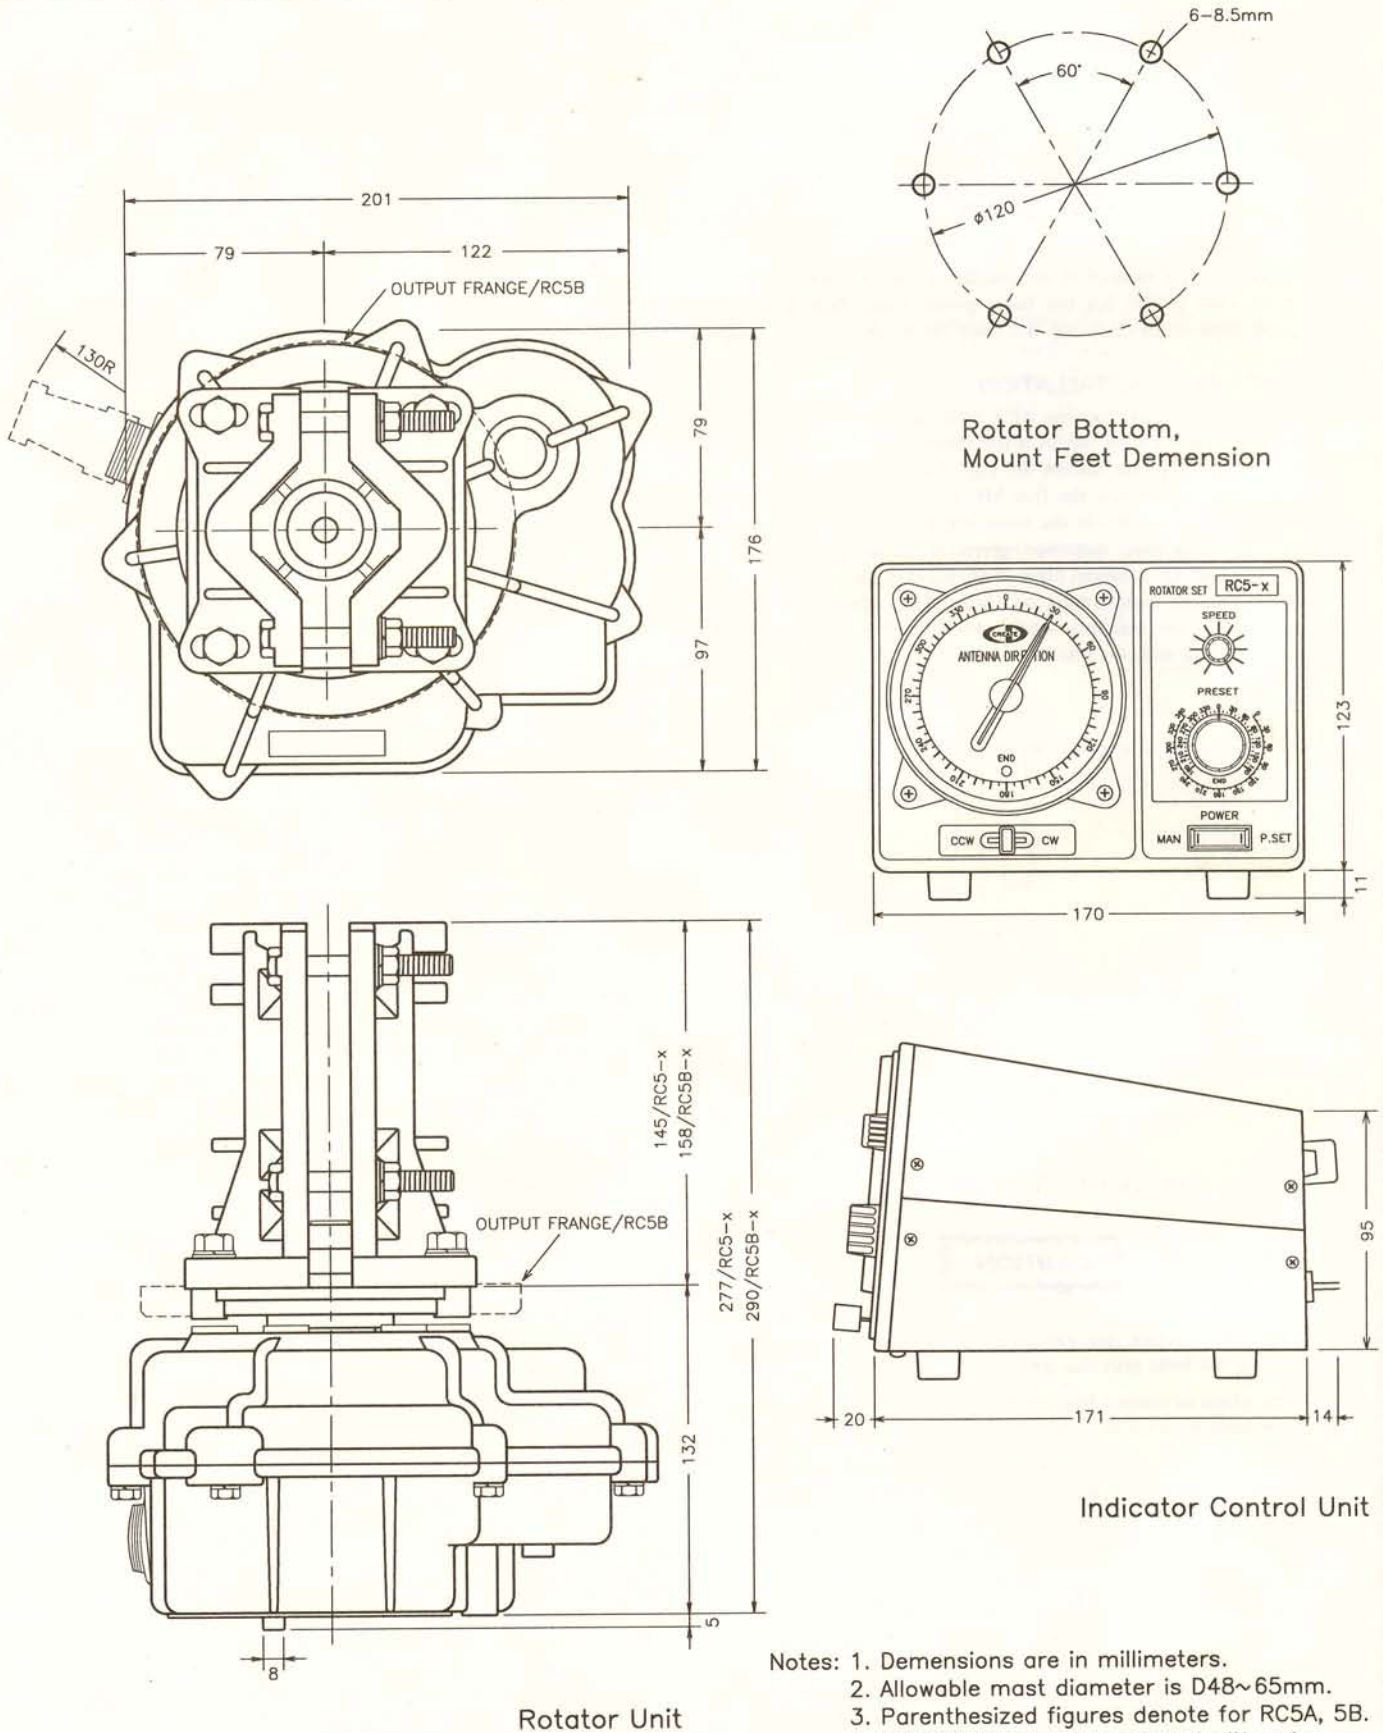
RC5x-x, Outline and Mounting Dimension
